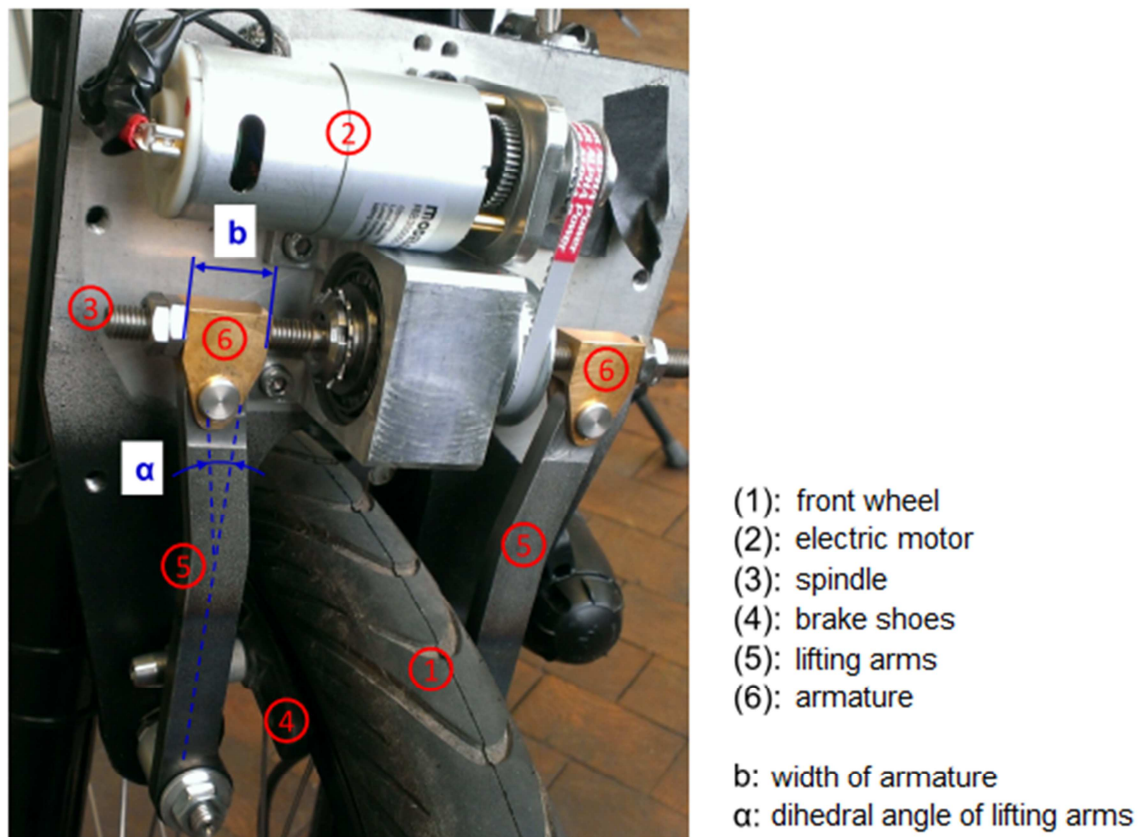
Prototype of locking system, located at the front wheel of the pedelec, Schreiber (2013)
